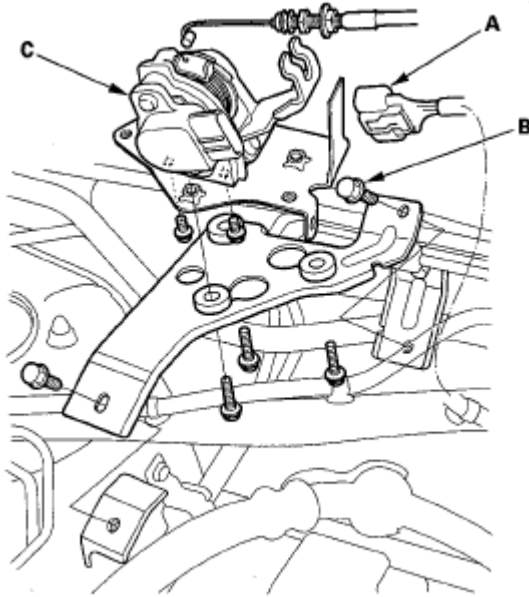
Identifying Accelerator Pedal Position (APP) Sensor 6P Connector And Bolts
